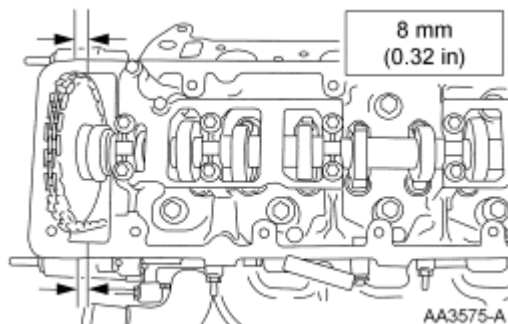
Applying Sealant At Engine Front Cover/Cylinder Head Surface
